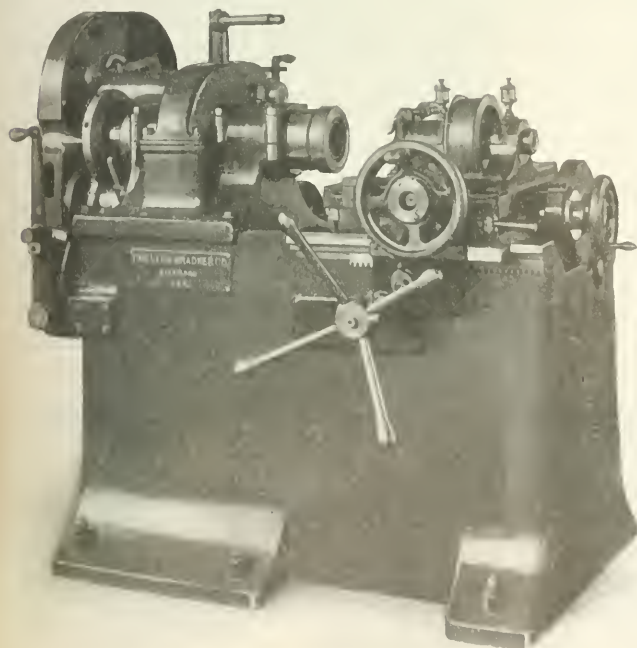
Lees-Bradner Thread Milling Machine for Internal and External Threading Operations
